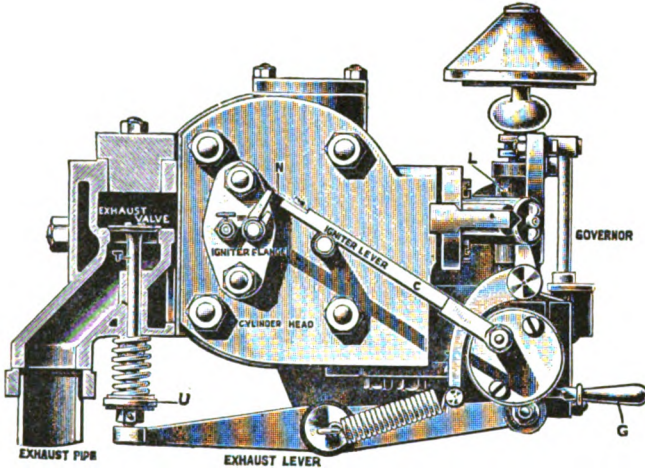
Cylinder and Governing Device of the Otto Gasoline-engine.
